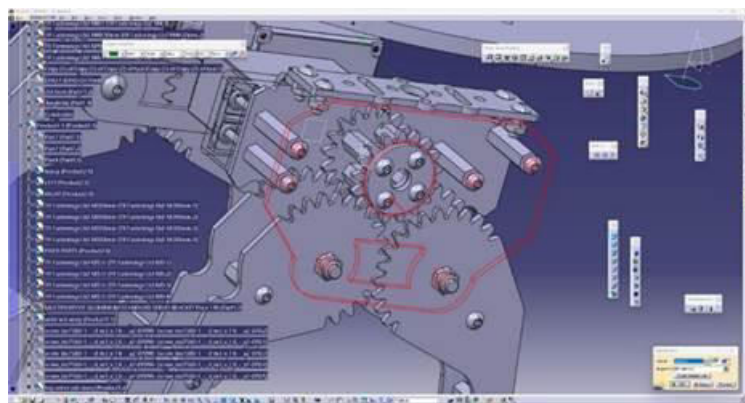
CAD Model of Gear-Driven Robotic Linkage Mechanism
